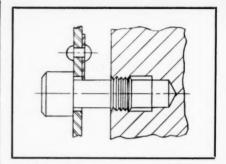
In this design of cover latch, a socket head cap screw is used.
